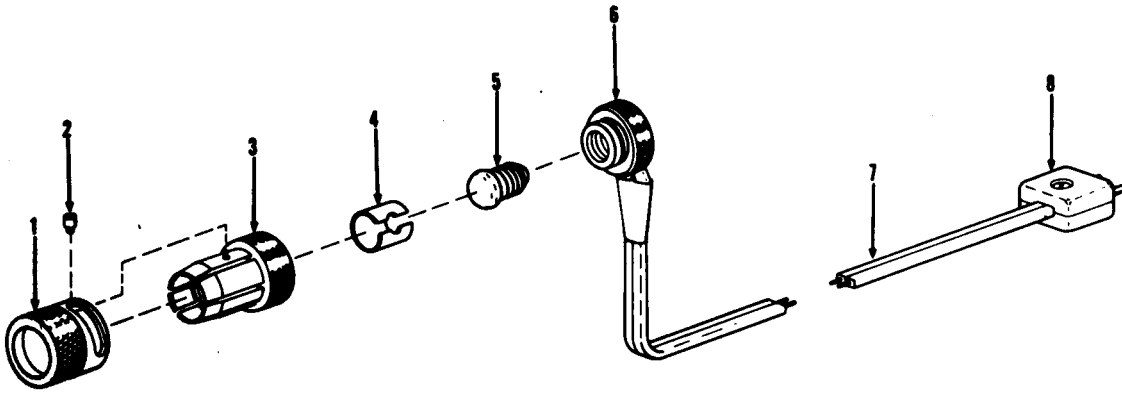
Hand lamp and electrical cable, model 242406, exploded view
